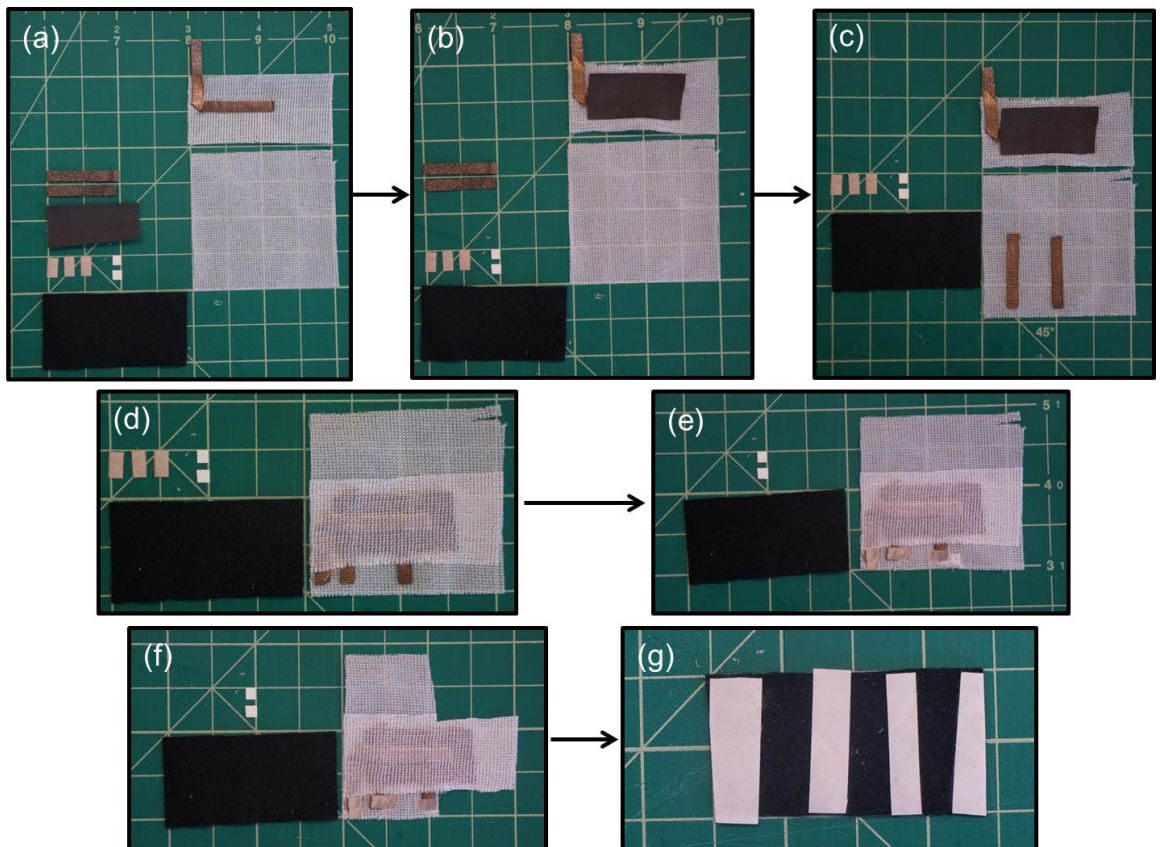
Fabrication steps to make the sensor cuff. (a) place the common conductive trace on the fusible interface; (b) apply piezoresistive layer; (c) apply remaining traces; (d) fix fusible layers together; (e) apply solderable pads; (f) cut fusible layer; (g) apply adhesive backing to outer fabric layer.
